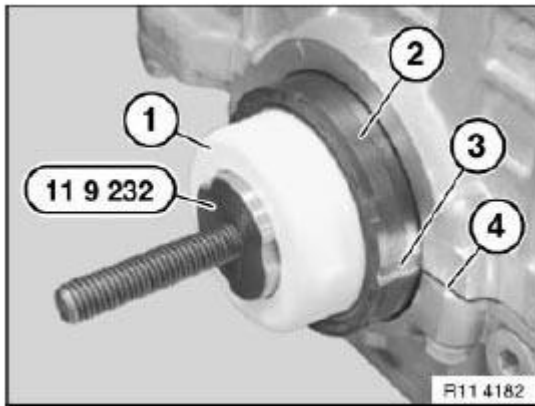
Identifying Support Sleeve, Crankshaft Seal, Groove, Housing Partition And Special Tool (11 9 232)
